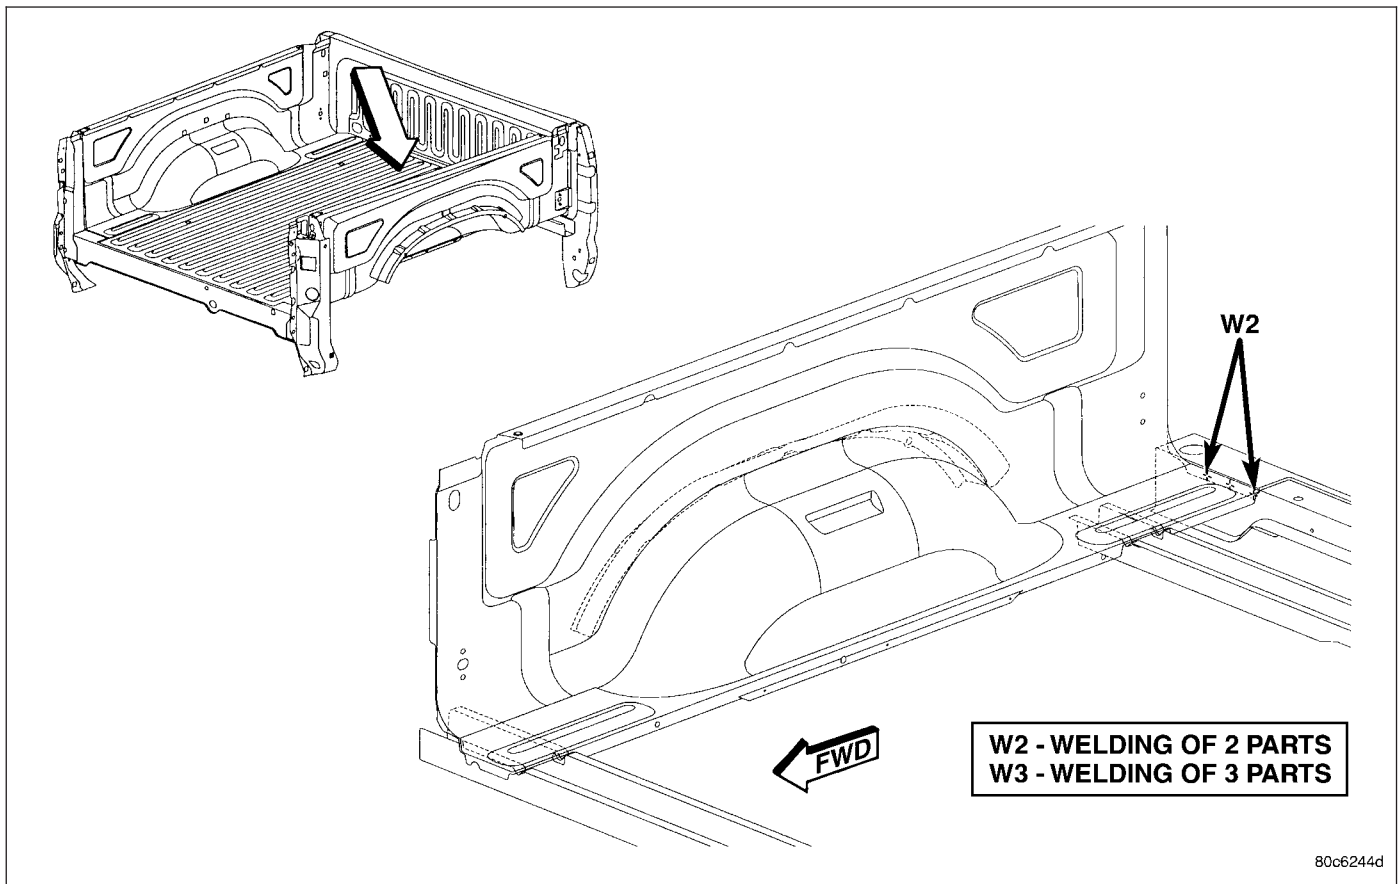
BOX FLOOR SILL CROSSMEMBER - SHORT CARGO BOX ONLY
